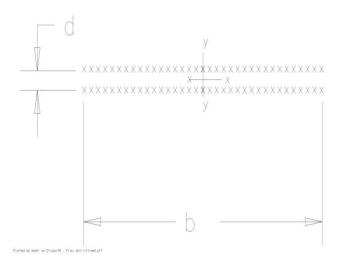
The weld configuration for the lifting lug of the coil insert lifting fixture (treat as line with unit thickness).
